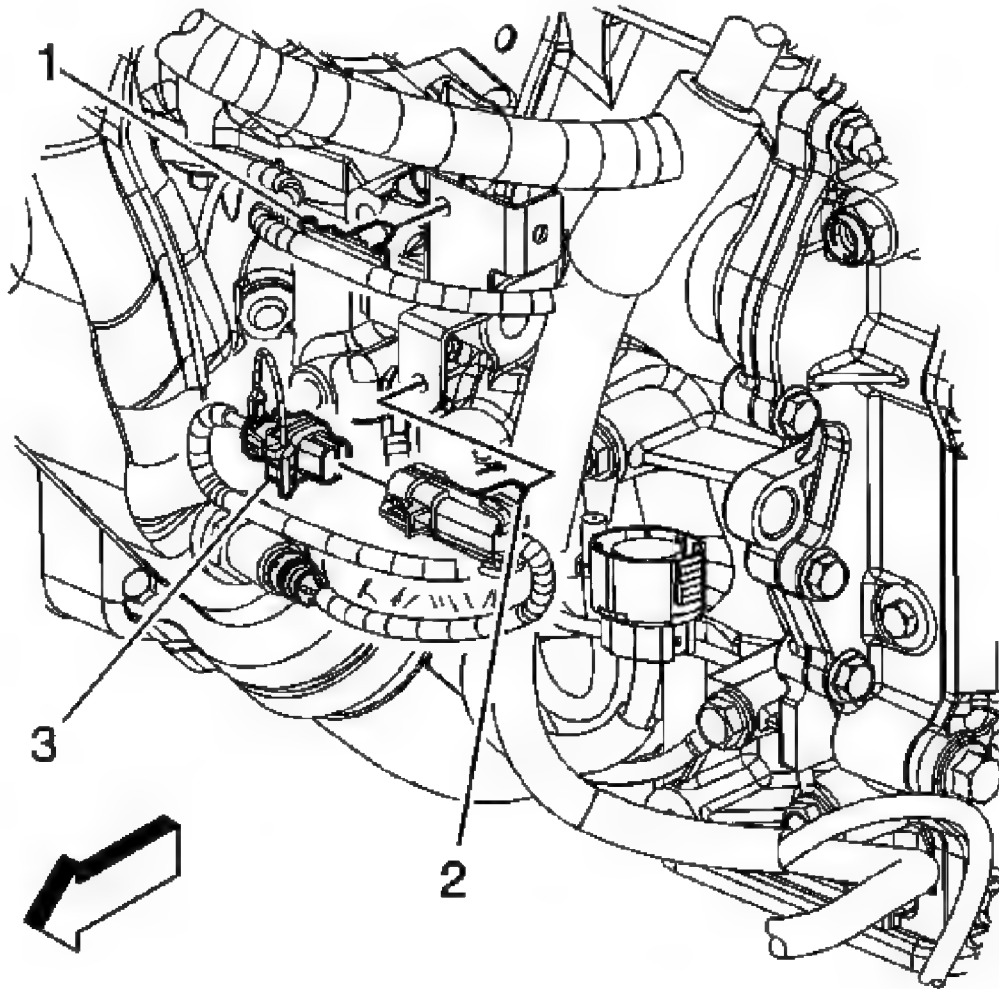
View Of Engine Harness Electrical Connector & Clips
